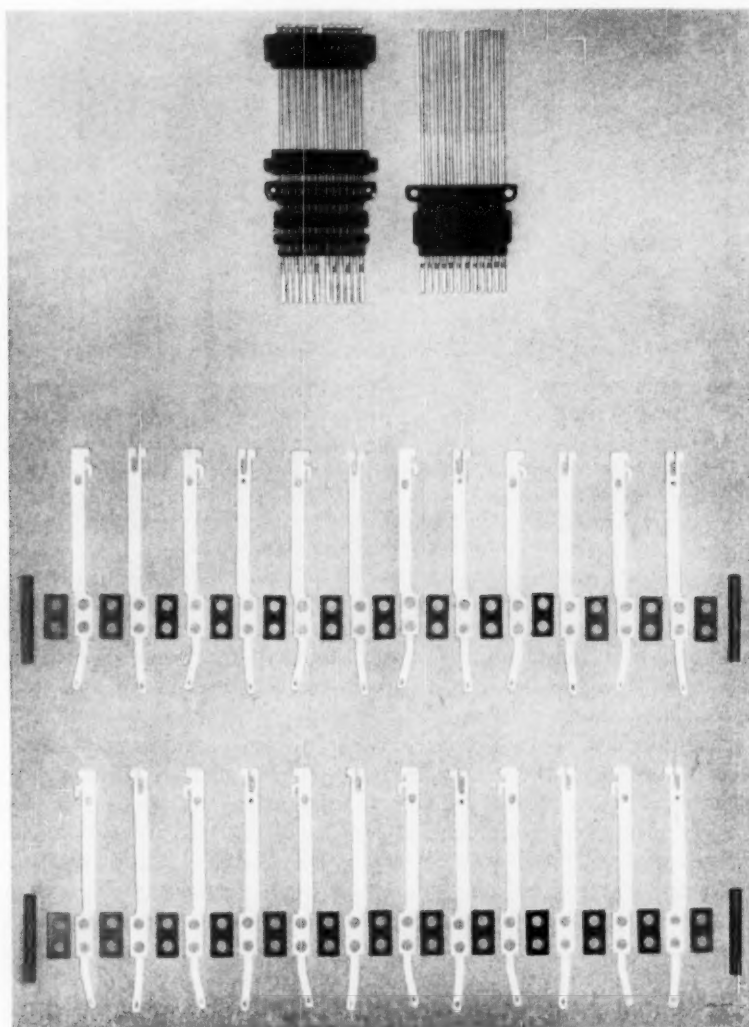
A comparison of the molded wire assemblies for twelve make contacts with the corresponding U relay parts.
